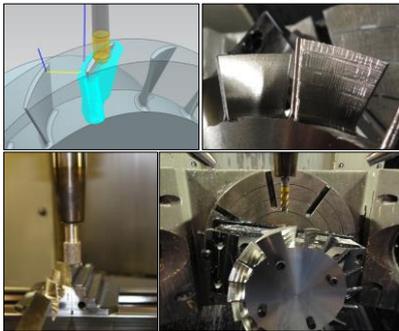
Case study: Blisk machining in a 5-axis multitasking machine
